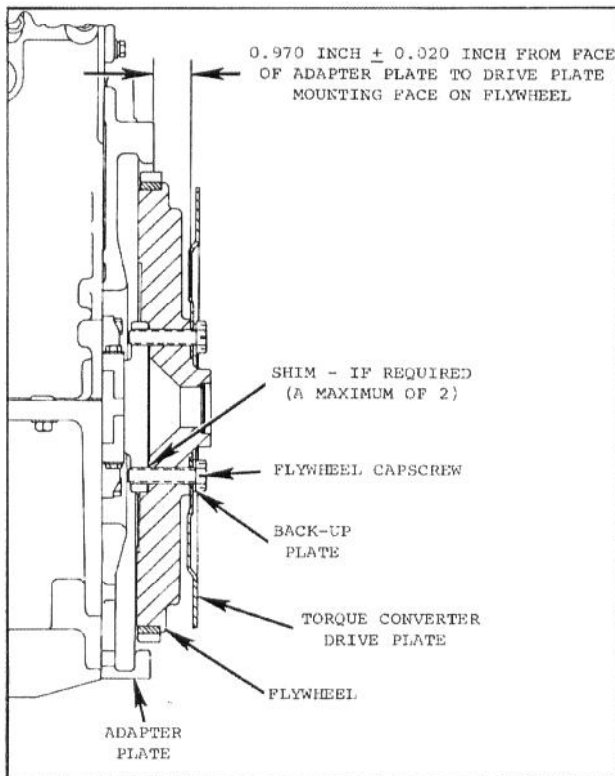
Converter Drive Plate and Back-Up Plate Installed
